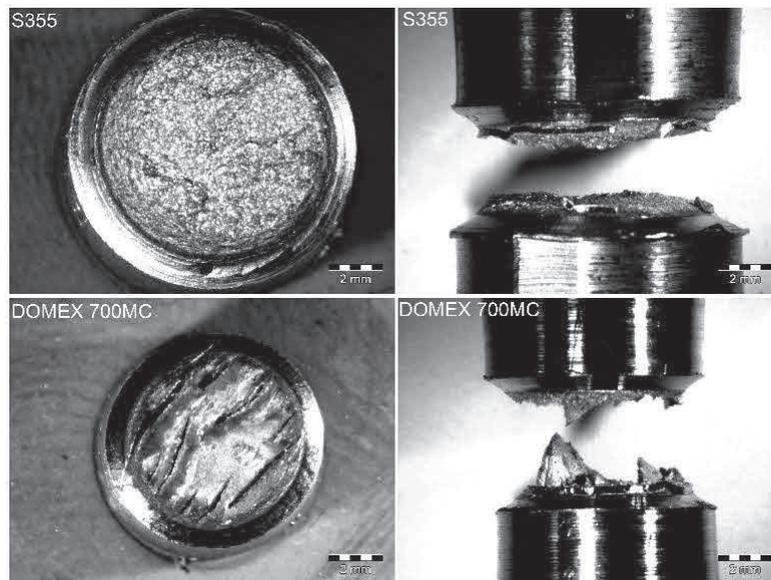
Unprecracked fracture surfaces of S355 and Domex 700MC
